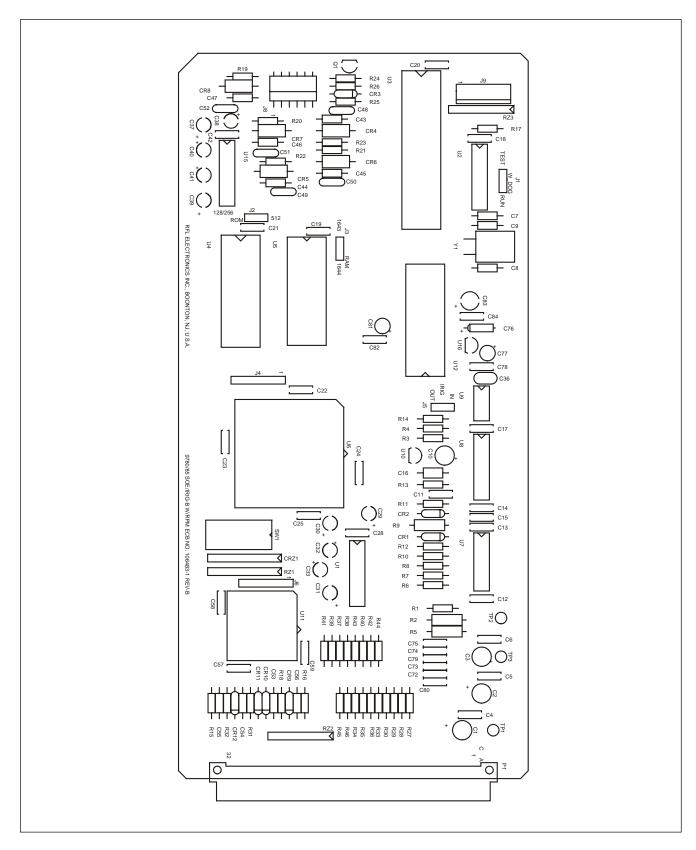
Component locator drawing, RFL 9780 SOE/IRIG-B Module
